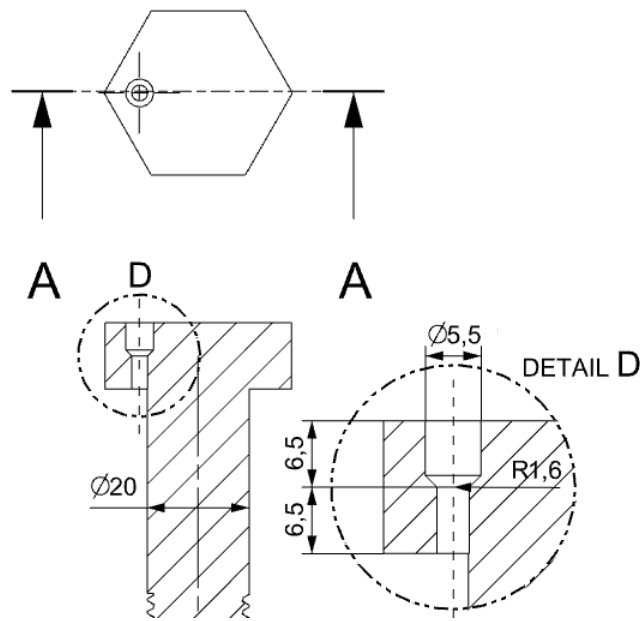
Bolt head with resin channel. Dimensions in mm for an M20 bolt. Diameter of resin channel is invariant with differing bolt sizes.
